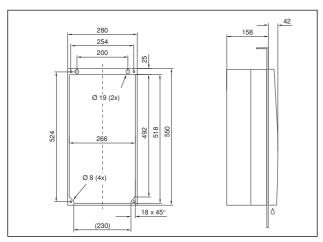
SK 3303.xxx/SK 3361.xxx full internal mounting
